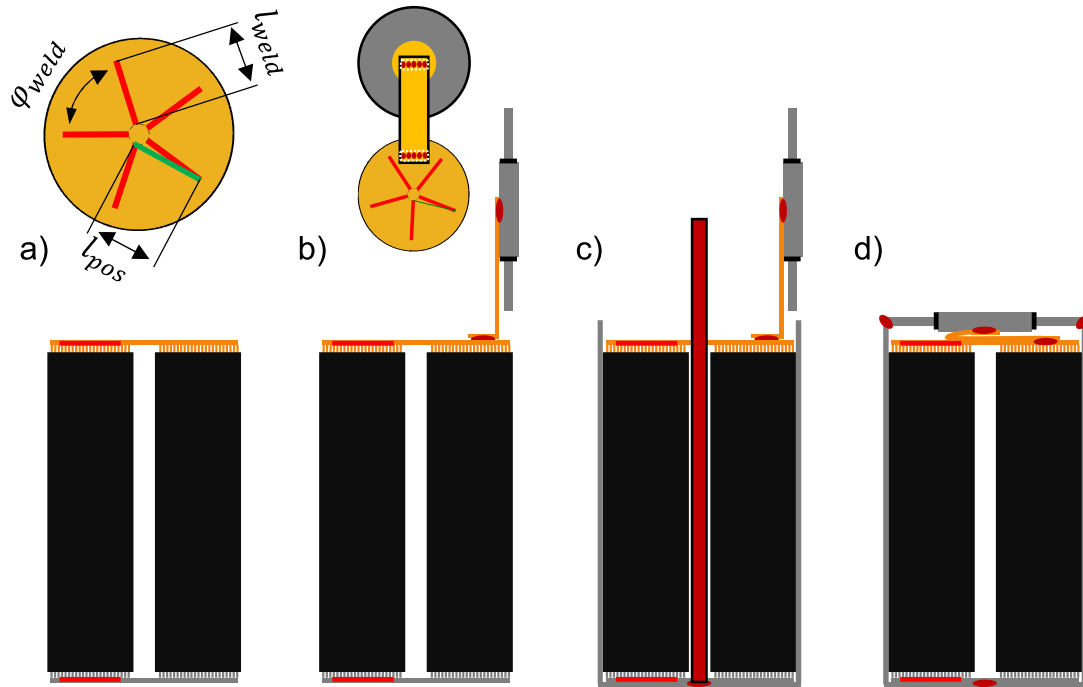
Welding strategy for manufacturing a tabless cylindrical lithium-ion cell based on the reference design [7,9,27,29] with impact extruded aluminum housing and laser welded endcap. Welds are marked as red lines and dots. (a) laser welding of collector plate to the jelly roll with continuous foil overhangs in a 90° angle at the example of the anode copper collector plate. The process is identical for the cathode aluminum collector plate on the opposite side. Note that the depicted collector plate is a simplified representation without holes and grooves that are actually present within the reference cell. (b) laser welding of copper strip to collector plate and central terminal to connect the anode to the negative terminal. (c) insertion of electrode through hollow core and ultrasonic welding of aluminum collector plate to the cell bottom to connect the cathode to the positive can, (d) bending of metal strip and laser welding of endcap to can. Note that the material combinations at the weld spots would be different for cells with steel housing as the potentials of terminal and can would be reversed.
